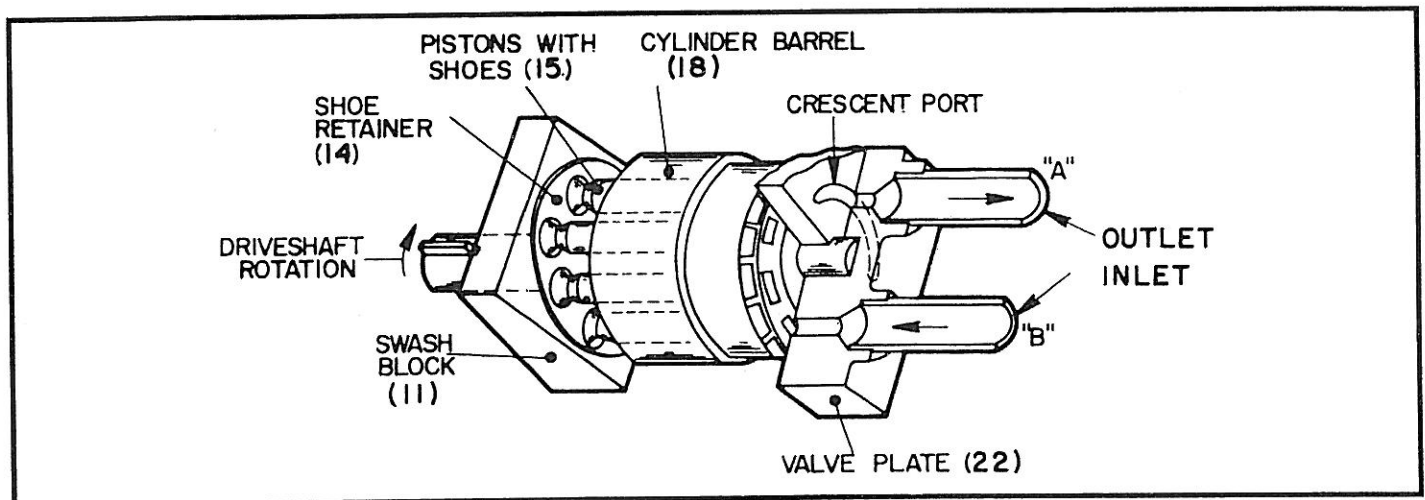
Type "PFWH" Pumping Mechanism shown from right side of pump (517474).
